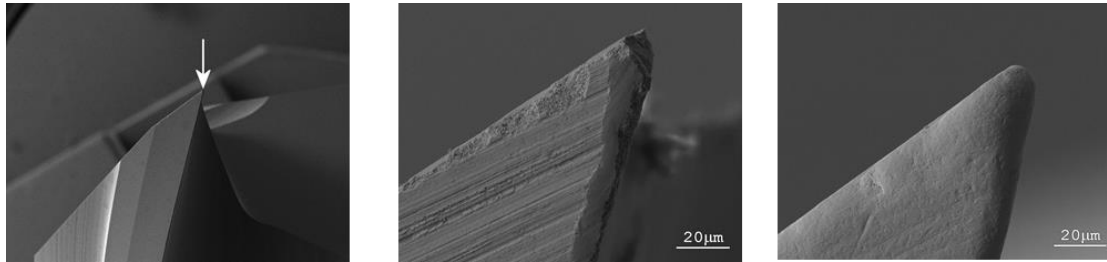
HM end mill with a cutting edge roundness of approx. 15 µm, machined with HSC 1/300
